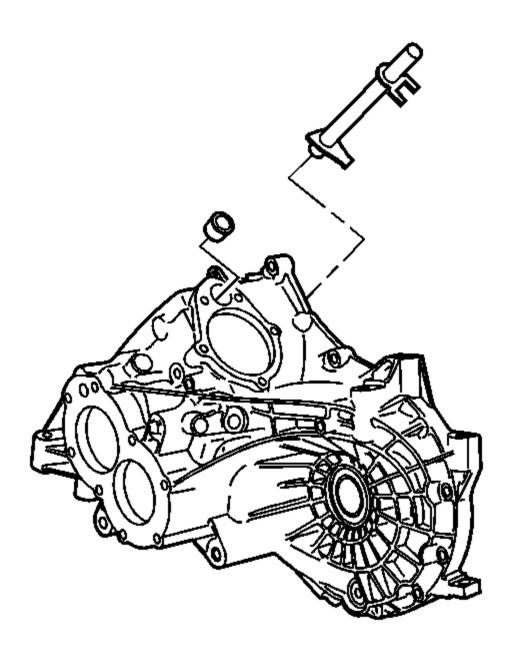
Shift Rod, Bushing & Transmission Housing Courtesy of GENERAL MOTORS CORP.
